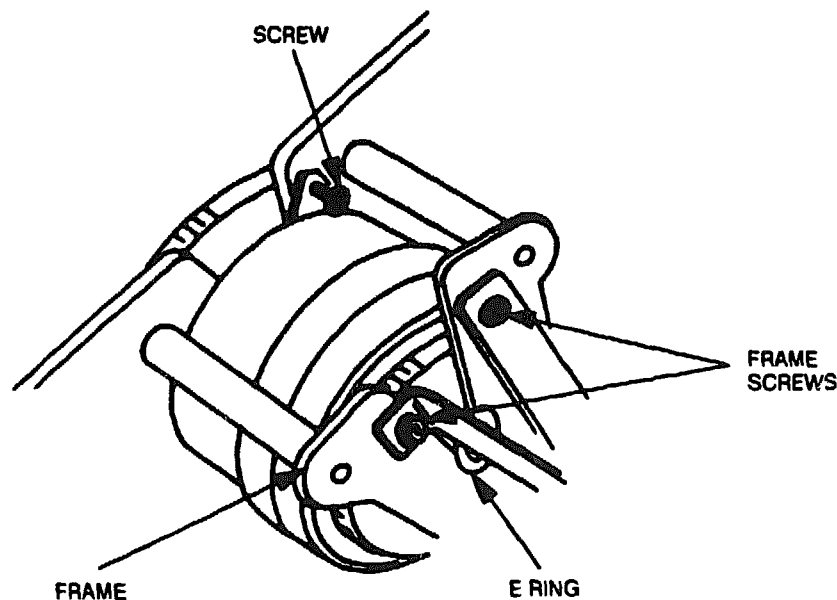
Upper Side Frame (L) Screws and E Ring
